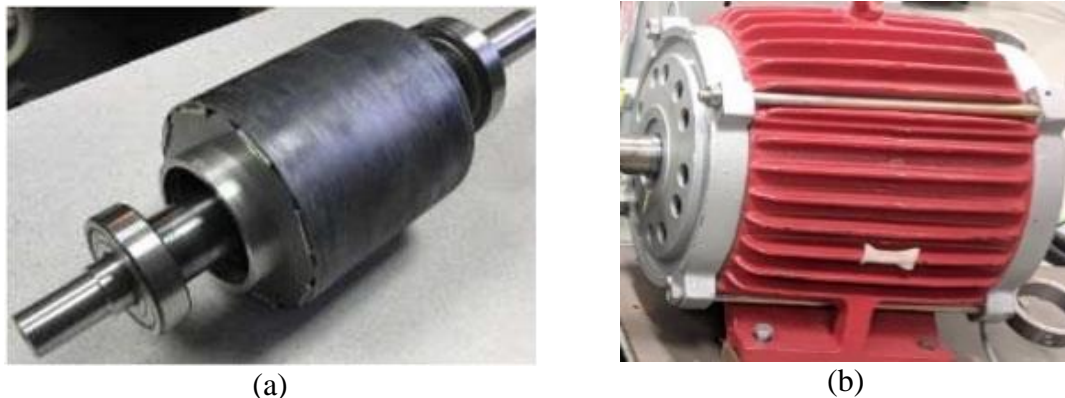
Parts of IPMSM. (a) rotor with shaft and bearings. (b) Assembled motor.
